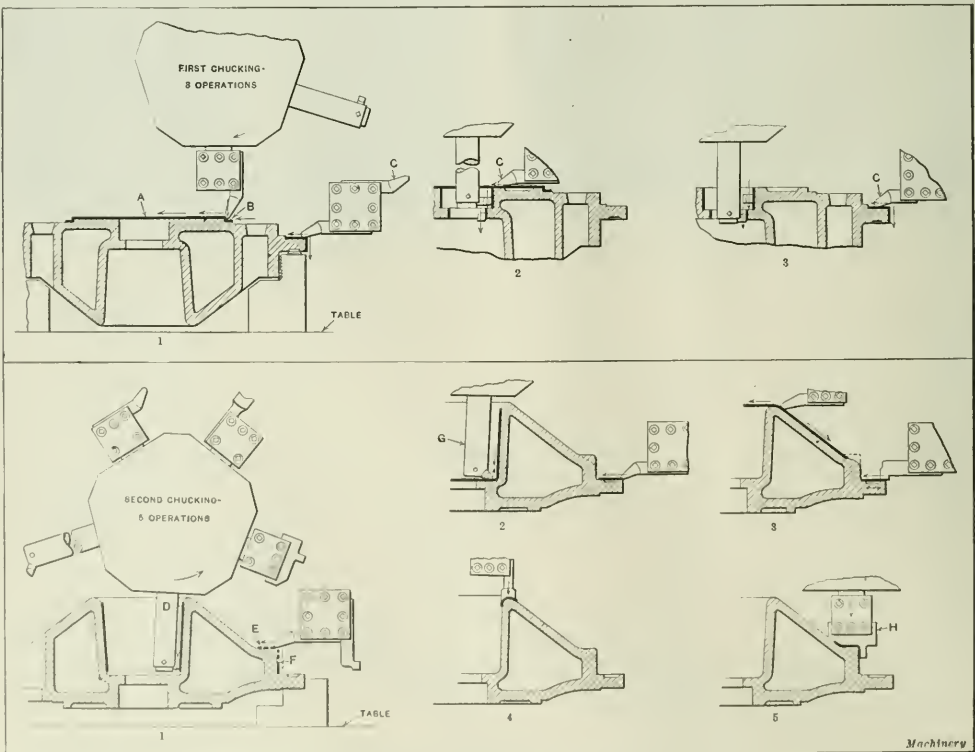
Tooling Arrangement used in the Two Machine Set-ups shown in Figs. 9 and 10 for machining a Locomotive Cylinder Head
